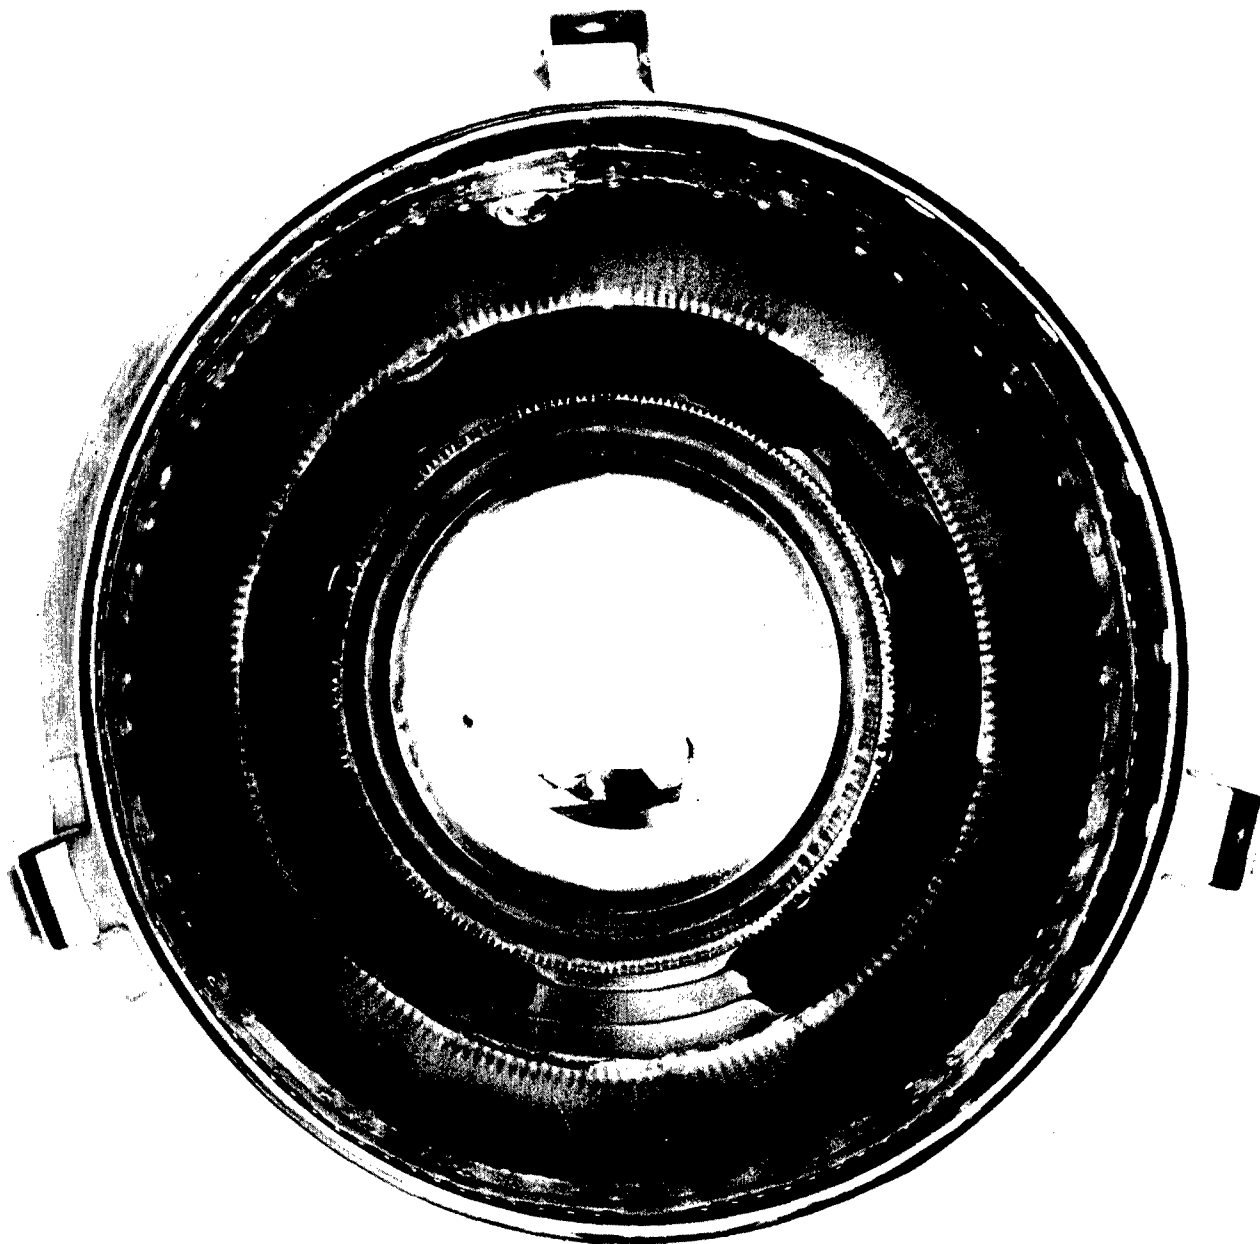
Outer Combustor Shell and Swirl Plate Assembly at Completion of Build 7 Testing - Turbine Rig.
